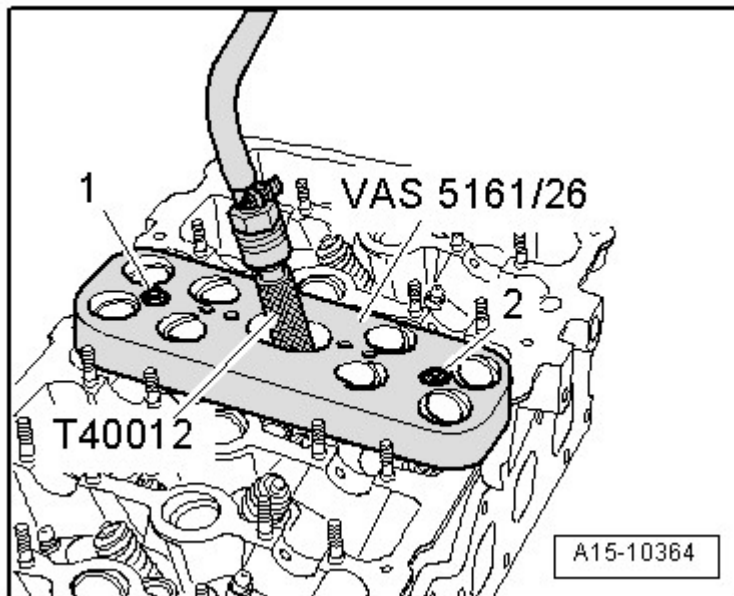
Identifying Guide Plate VAS 5161/26 Installed On Cylinder Head And Installation Of Adapter T40012
